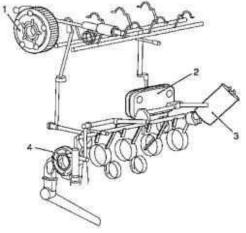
Contour grease gasoline engine Z 18 XER DOHC-I: 1 - regulators of camshaft, 2 - oil cooler, 3 - Oil filter, 4 - oil pump
